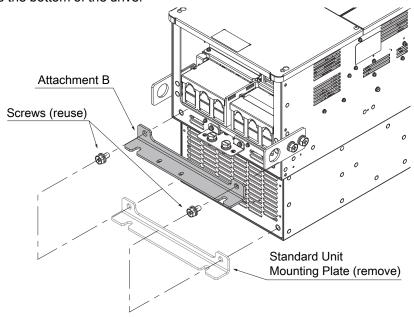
Remove Bottom Mounting Plate and Attach Attachment B
